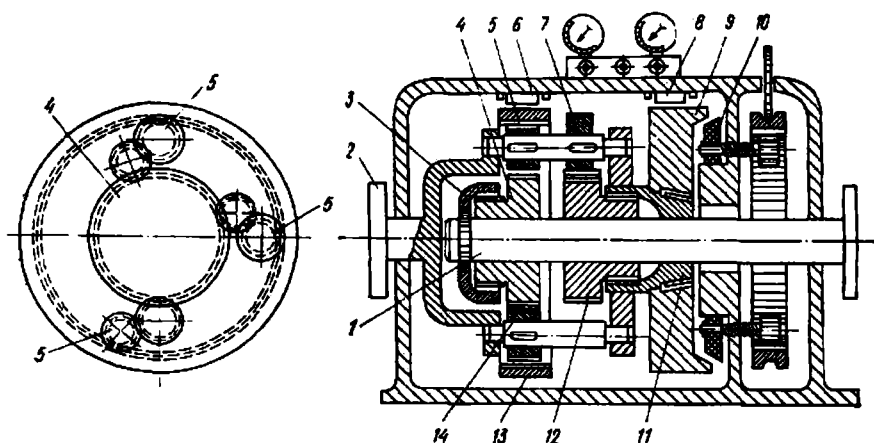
Remotely-controlled clutch doubling as reduction and reverse gear, type NVD-24 diesel engine
